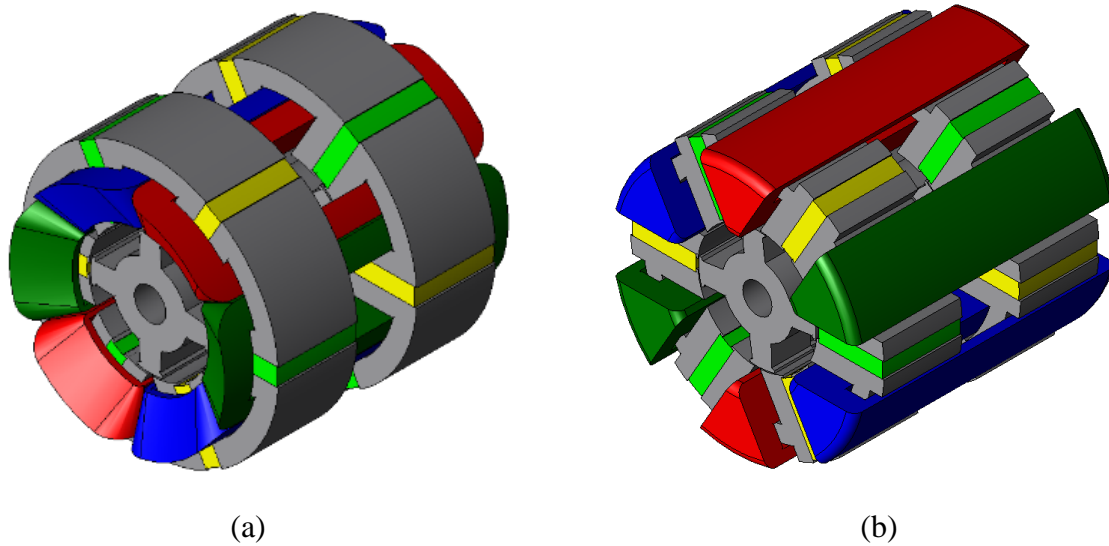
3D view of the three dual-stator 6/4 FSPM machine under comparison (a) DLCW 6/4 FSPM machine (b) SLTW 6/4 FSPM machine
